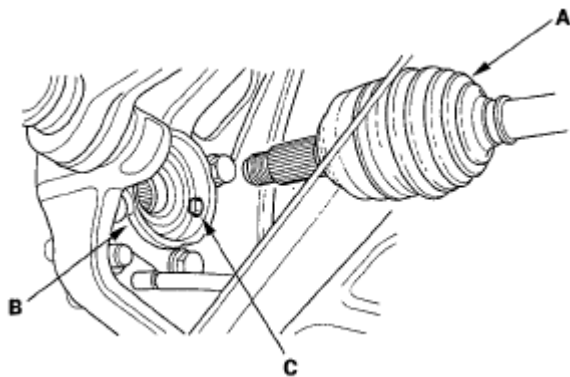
Identifying Outboard Joint, Rear Hub And Wheel Sensor
